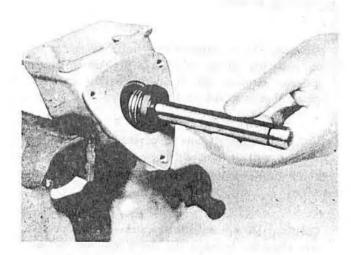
Starting Piston, Retainer, and Seal Into the Cylinder
